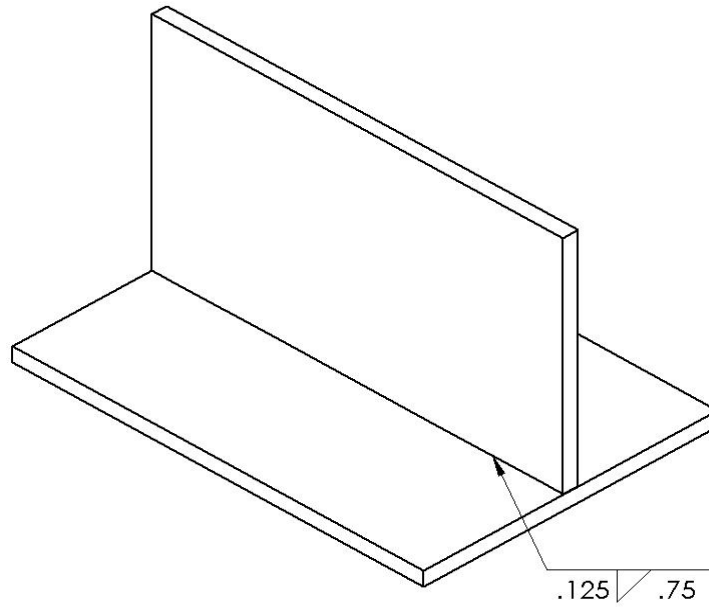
Shows how to correctly denote a weld. In this case, the weld is called out with a bead size of .125 and a length of .75.
